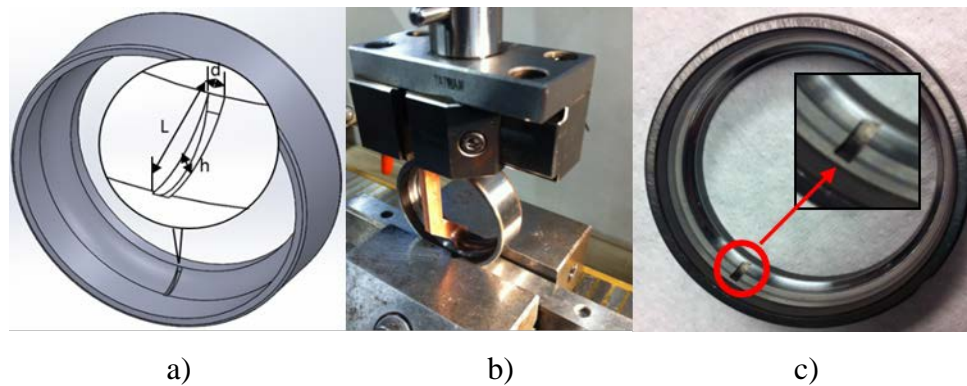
a) A line-spall defect on the outer race b) Seed defect with EDM c) 1.530mm outer race defect.
